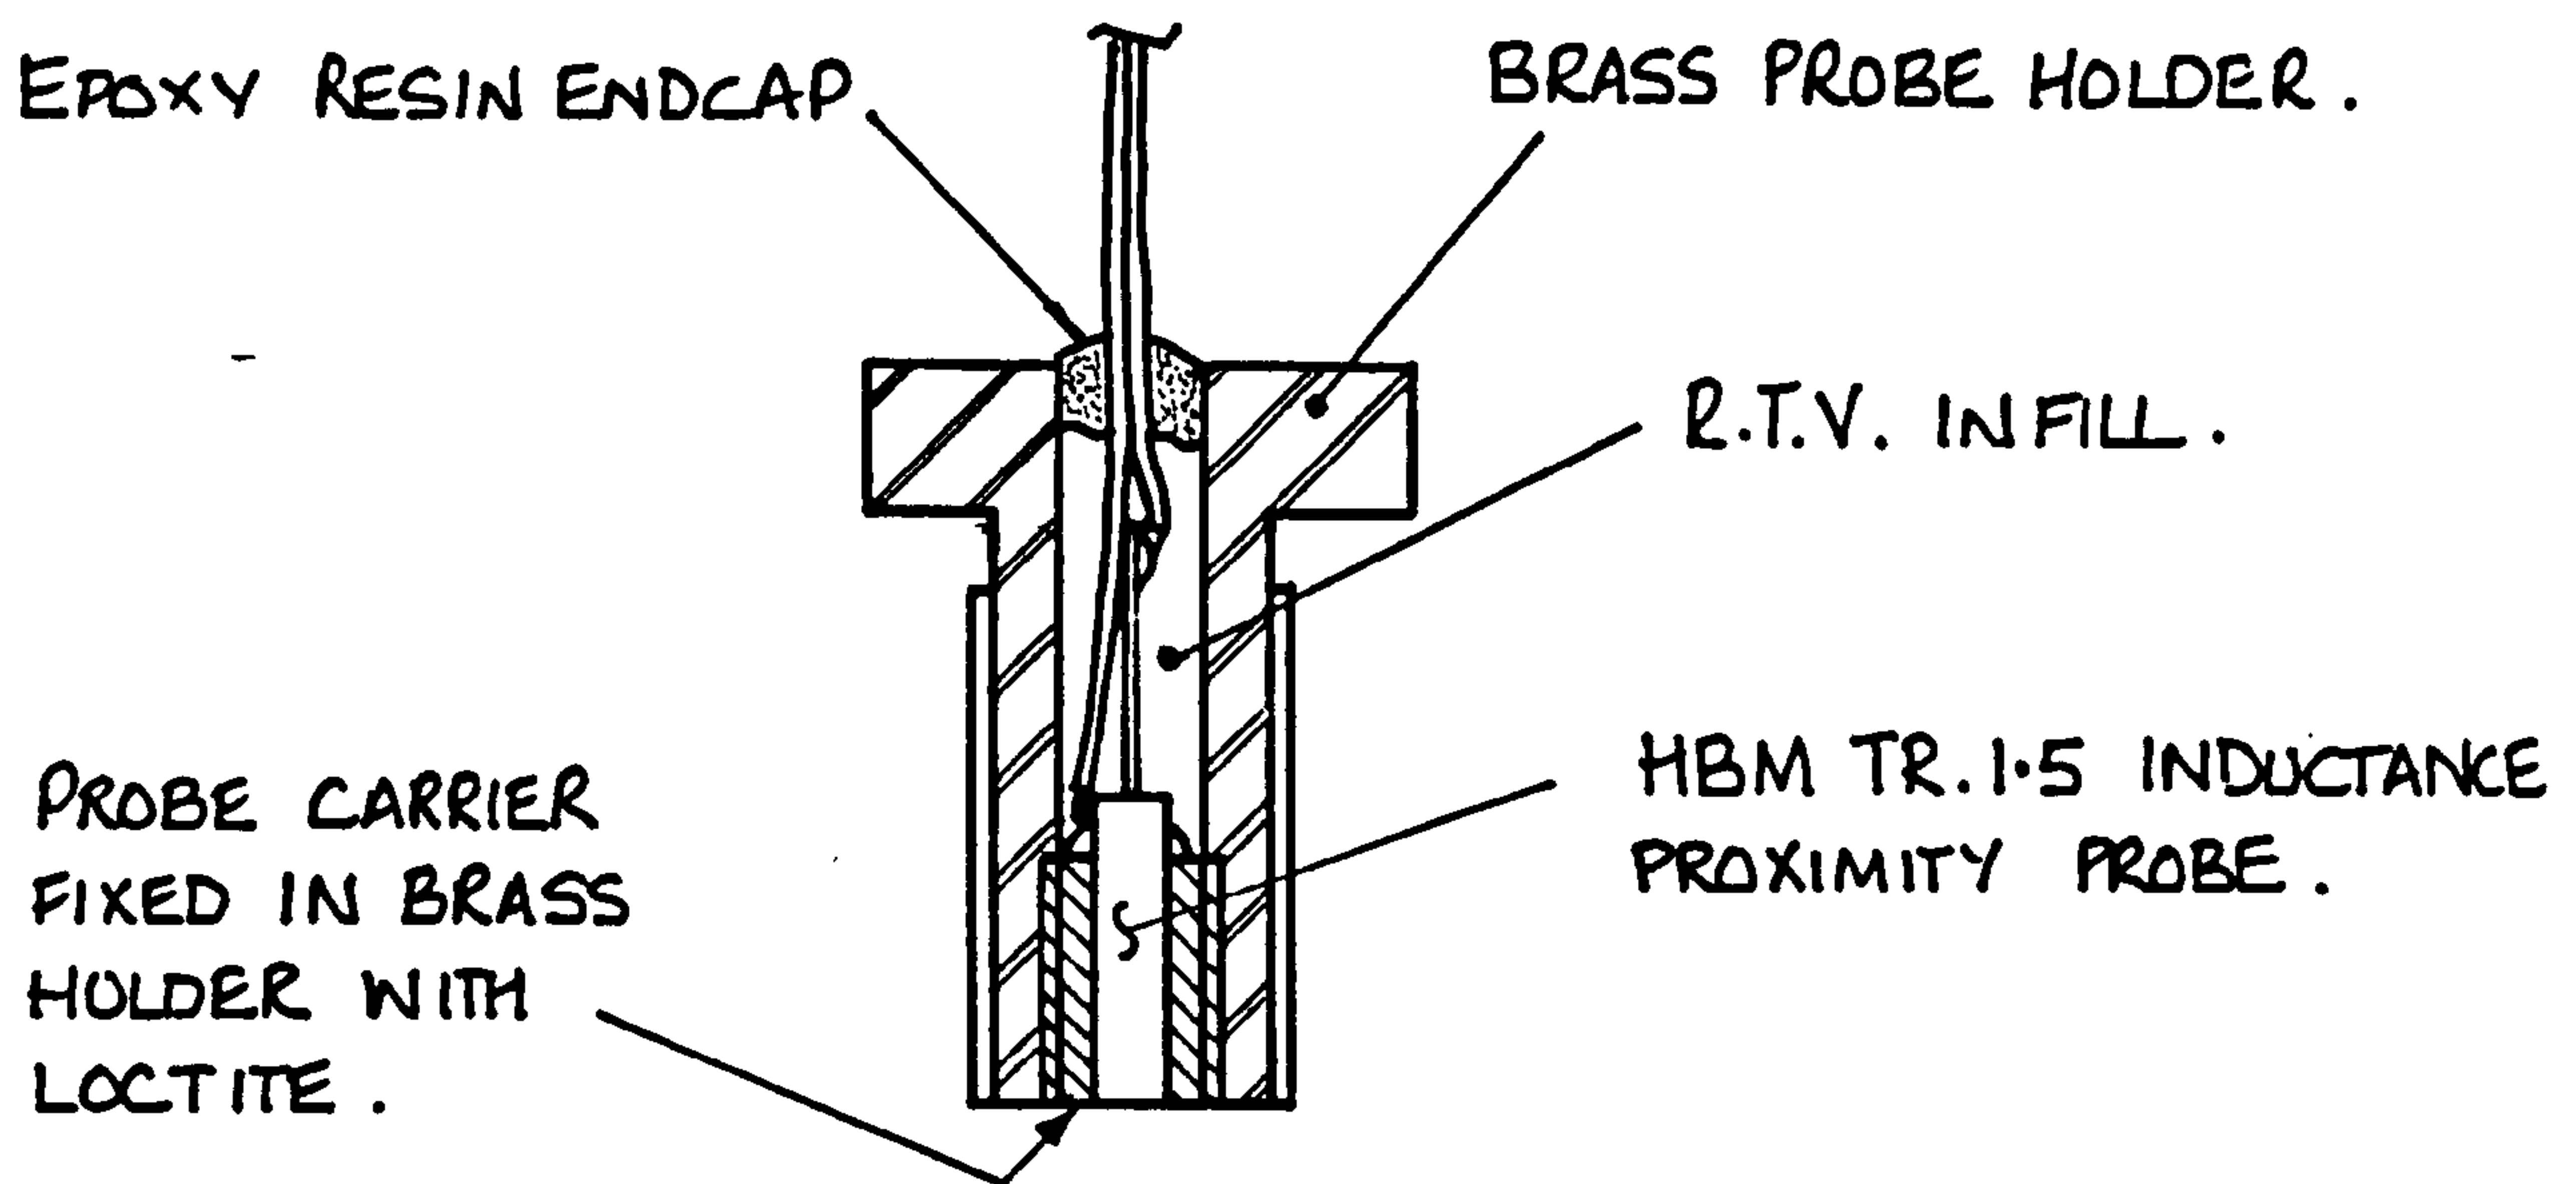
INDUCTANCE PROBE ASSEMBLY.
